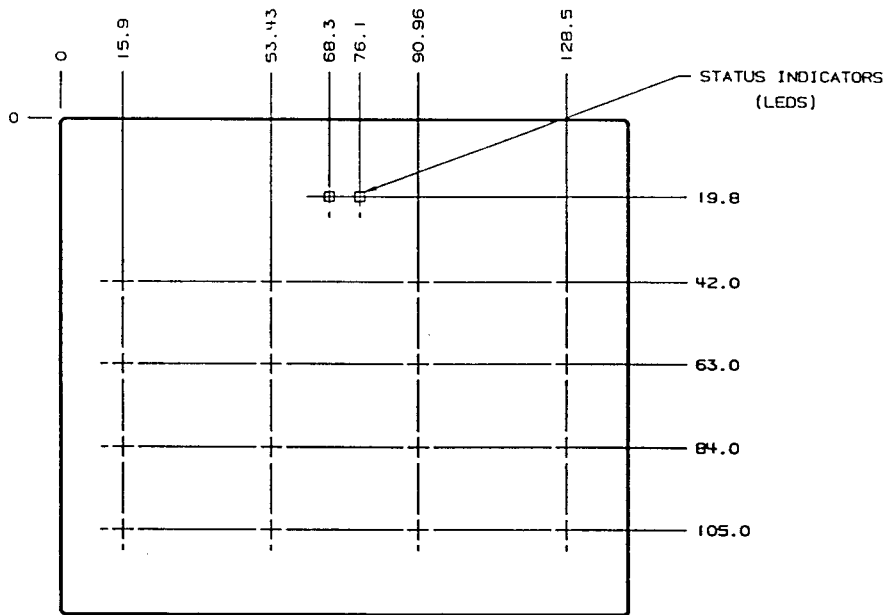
Front Panel 16 Component Gridwork, 3/8 Module
